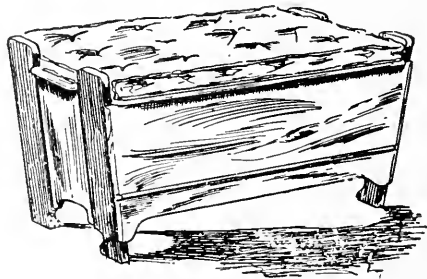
A Slipper Stool.—The Legs Stand  $1\frac{3}{4}$  Inches from the Perpendicular at the Bottom.
